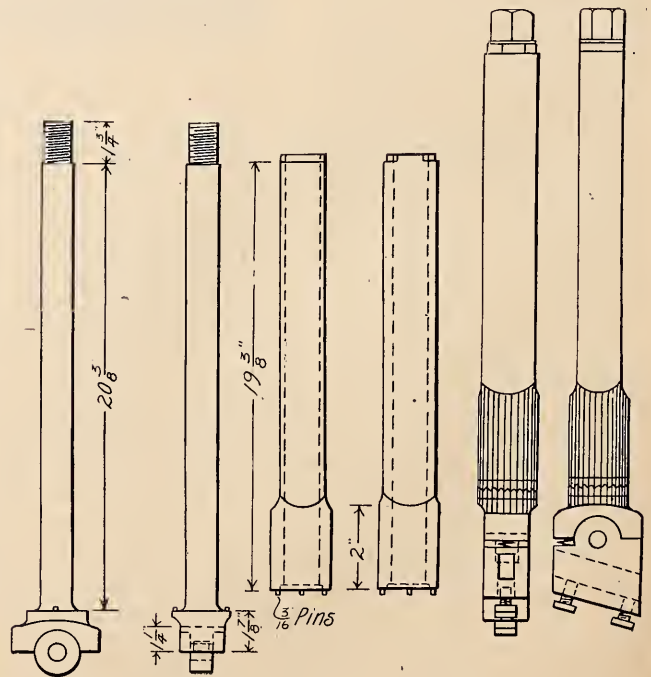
TOOL HOLDER FOR SLOTTING MACHINE.
